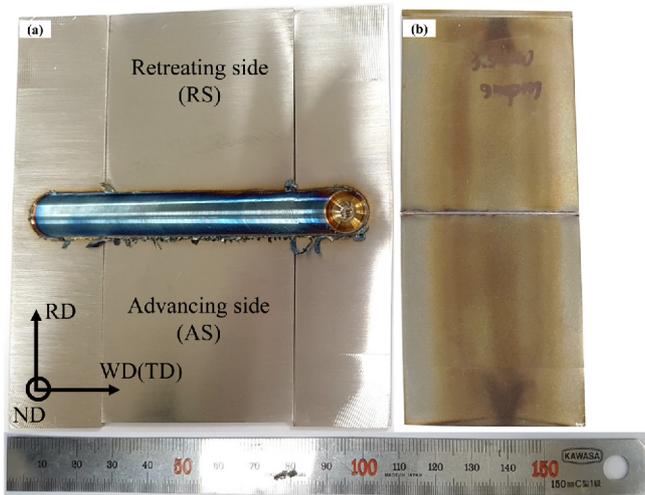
Photographs of the welded specimens. (a) FSW and (b) LW.
